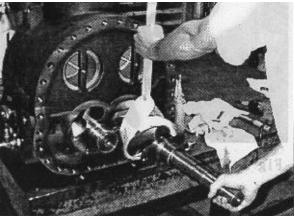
Stamp marks on M Rotor lobe ends Fig. 5-13 Mounting Rotor
